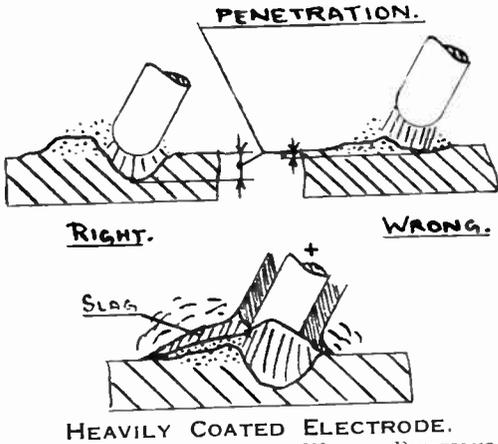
THE RIGHT AND WRONG POSITIONS OF HOLDING THE ARC.
